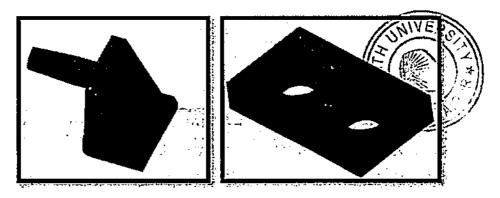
(a) SIDE CORE; (b) WEAR PLATE
